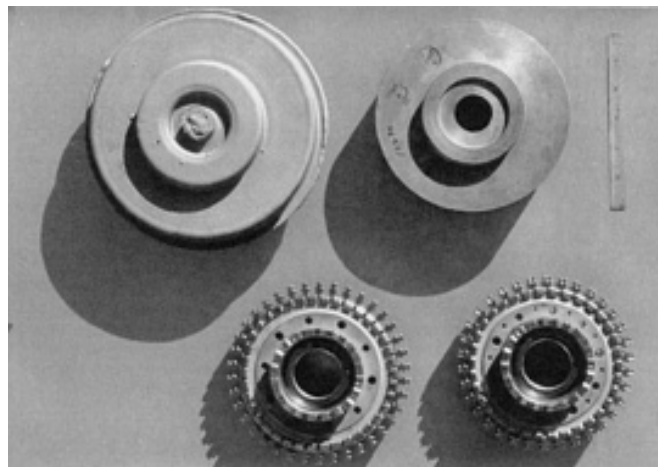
As-HIP René 95 turbine disks. As-HIP shape (upper left), sonic shape (upper right), finished machined disks (bottom). Courtesy Crucible Compaction Metals
